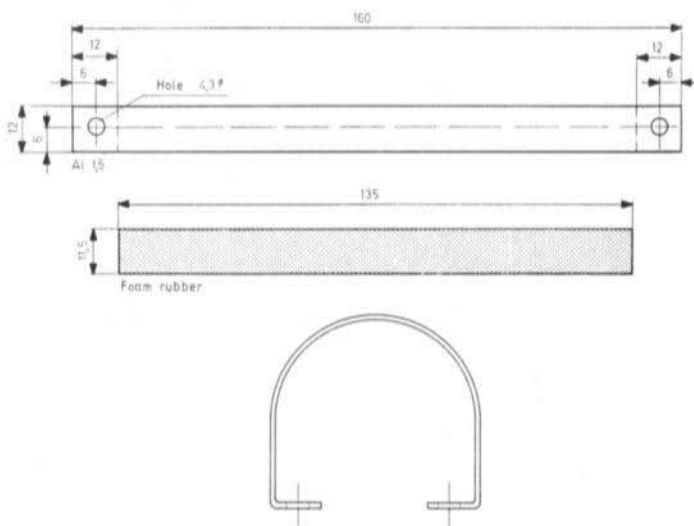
Mounting bracket (2 pieces) for the accumulator
